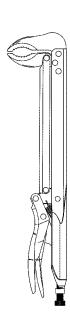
is a bottom right perspective view of the first embodiment of the tool;
